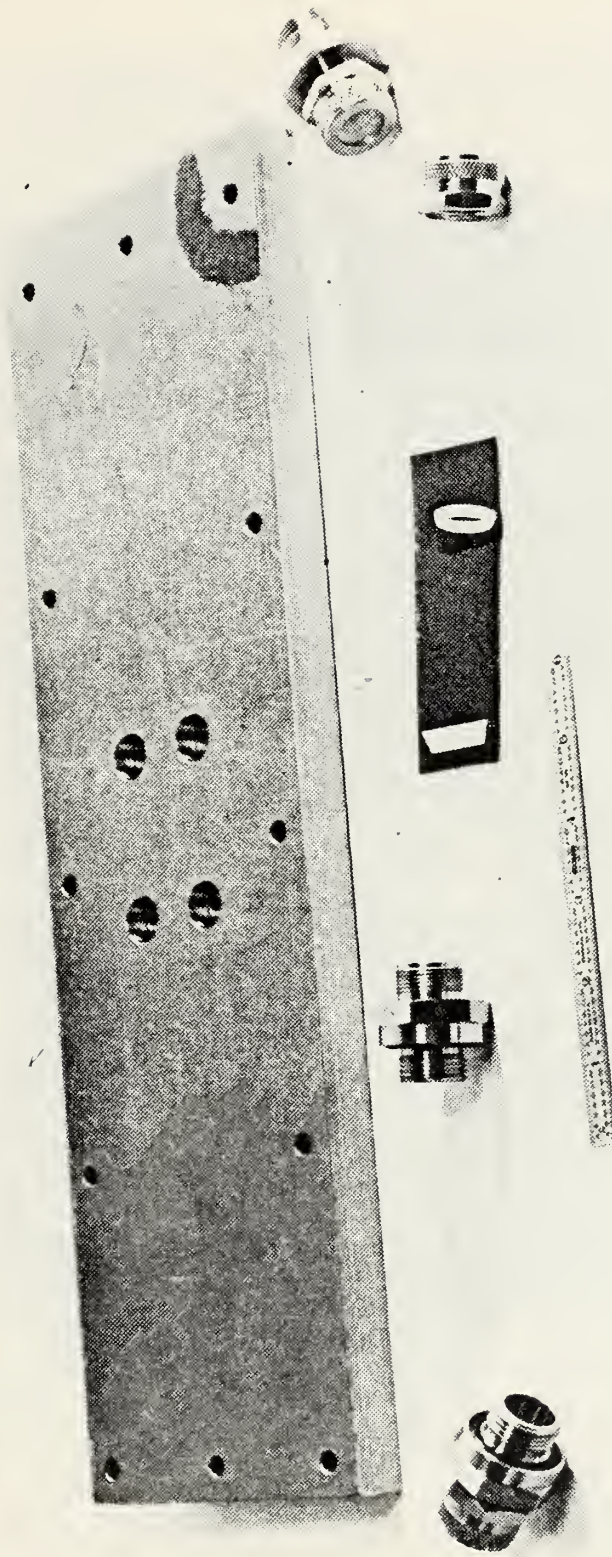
Photograph of Tube Sheet and Drilled Out Swagelok Fittings.
